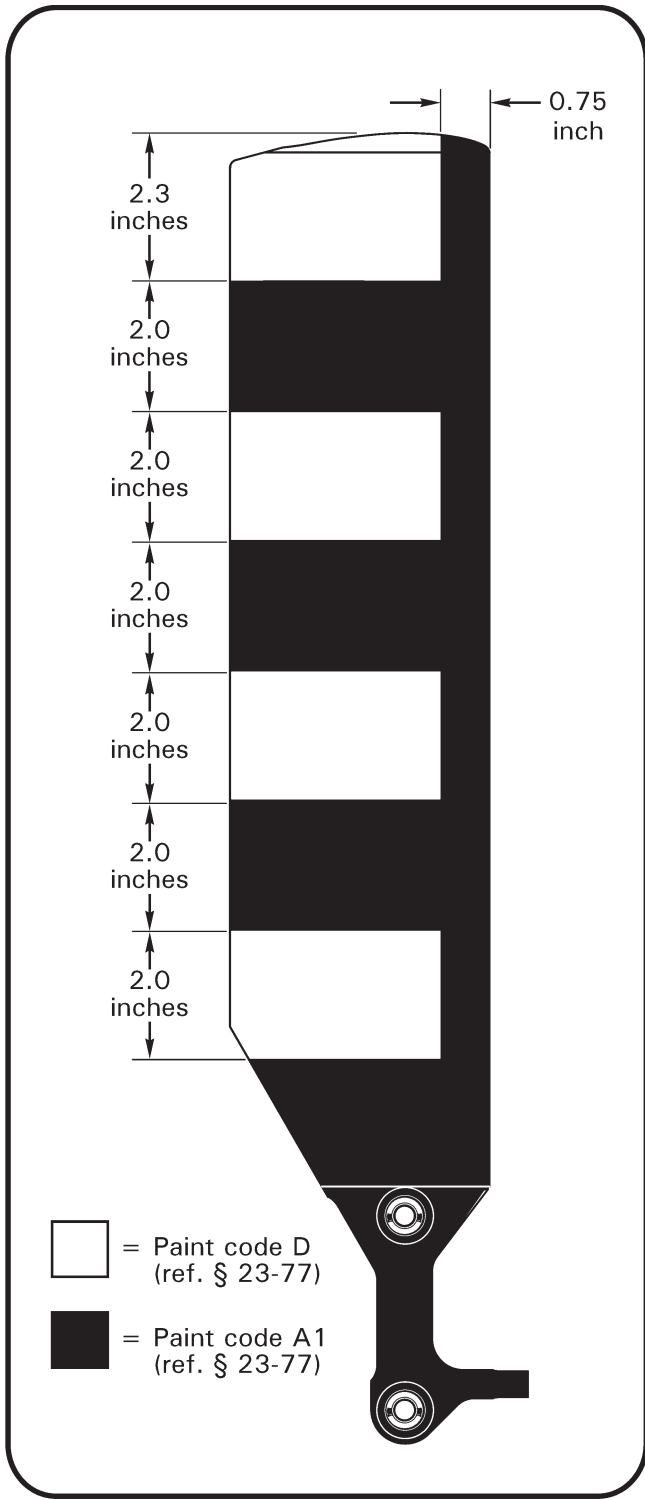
TAIL ROTOR BLADE PAINT SCHEME
